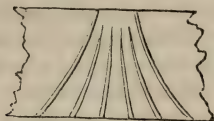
Drawing Frame ; curved guide plate of the drawings.
